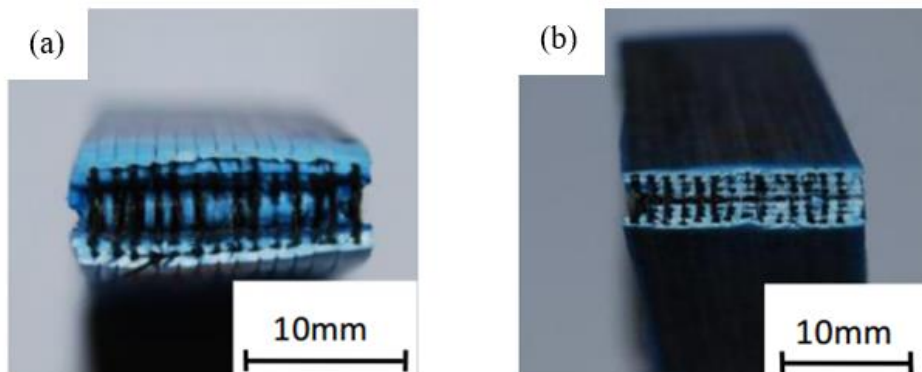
Fracture patterns of fractured cross section of CFR PLA composites:(a) 180°C, (b) 240°C.^[38]
